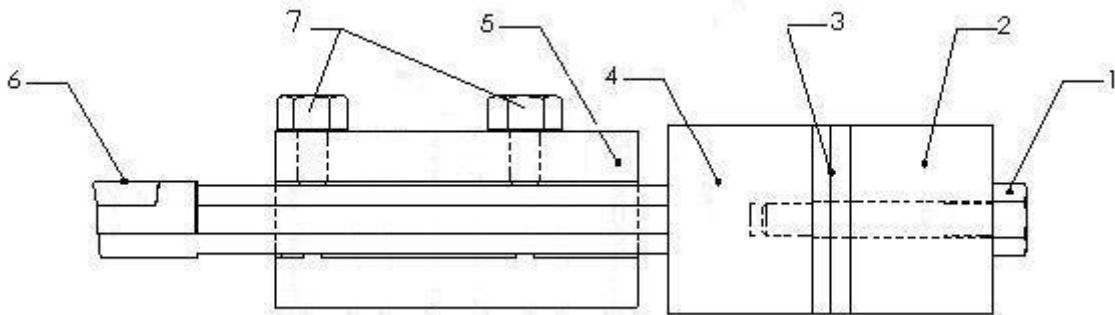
Scheme of turning tool with holder: 1 – connecting bolt, 2 – backing, 3 – piezoceramic rings, 4 – cutting tool (horn), 5 – tool holder, 6 – insert, 7 – fixing bolts
